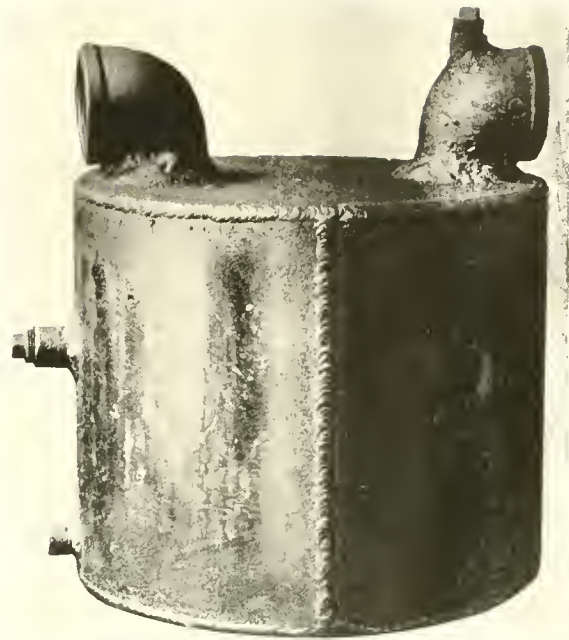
Gas tank made by the Boom Boiler & Welder Co., Cleveland. This tank has been made both by arc welding and by acetylene welding. The arc welding costs 1 to 1 $\frac{1}{2}$ as much as gas welding. The tank is tested at 150 lbs. water pressure.
